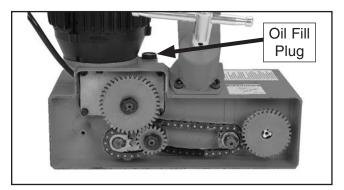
Location of gearbox fill plug/oil drain and sight glass.
